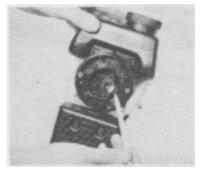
Make sure no foreign material has clogged reed plate passages.
